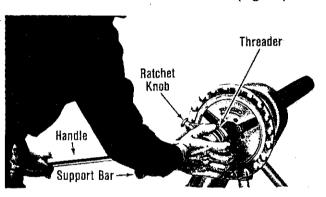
Pushing Threader onto Pipe to Engage Dies.
